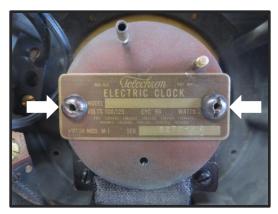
The location of the two machine screws holding the stator and motor in place in the clock casing.
